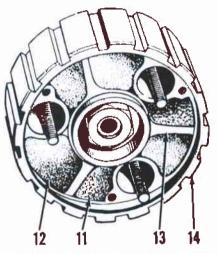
Clutch cushions should be installed as shown. Use soap if necessary when installing, but do not use oll or grease.
